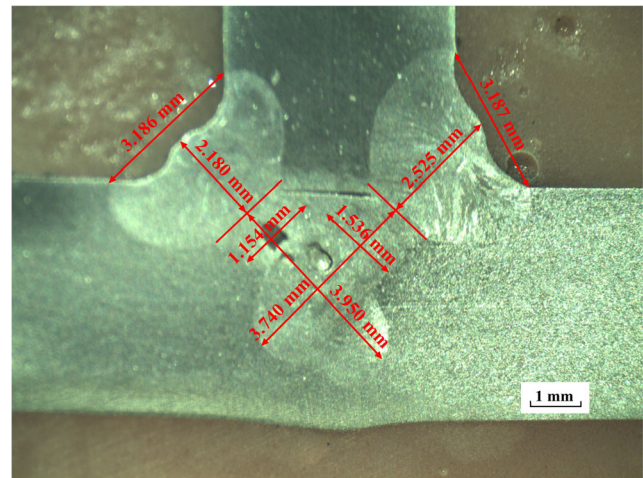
T-joint bead geometry of laser welding 316L steel
